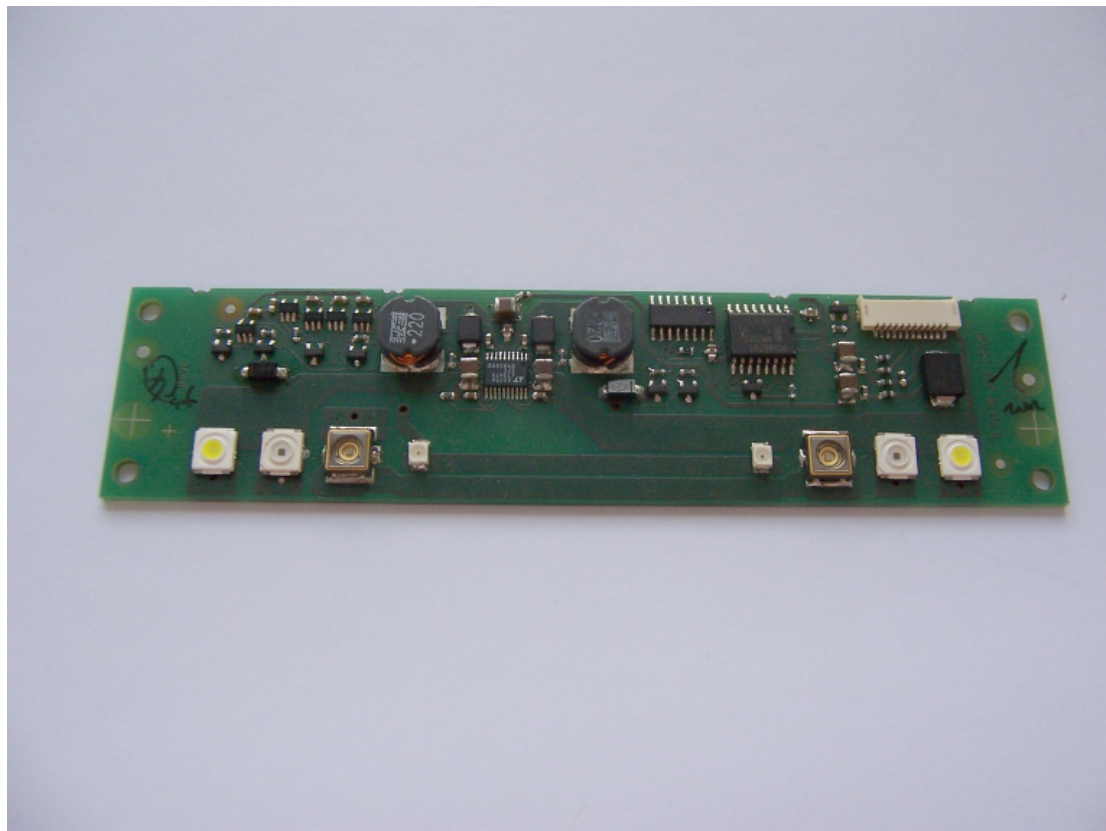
Power PCB with LED and lens, RJ0479:312.25 RevD, Rear
